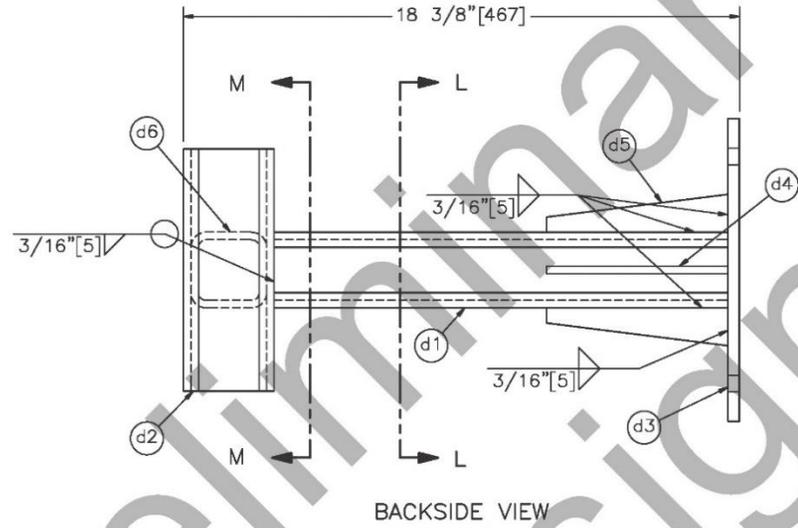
Upstream Ground Strut Details, Test No. SPTA-2
